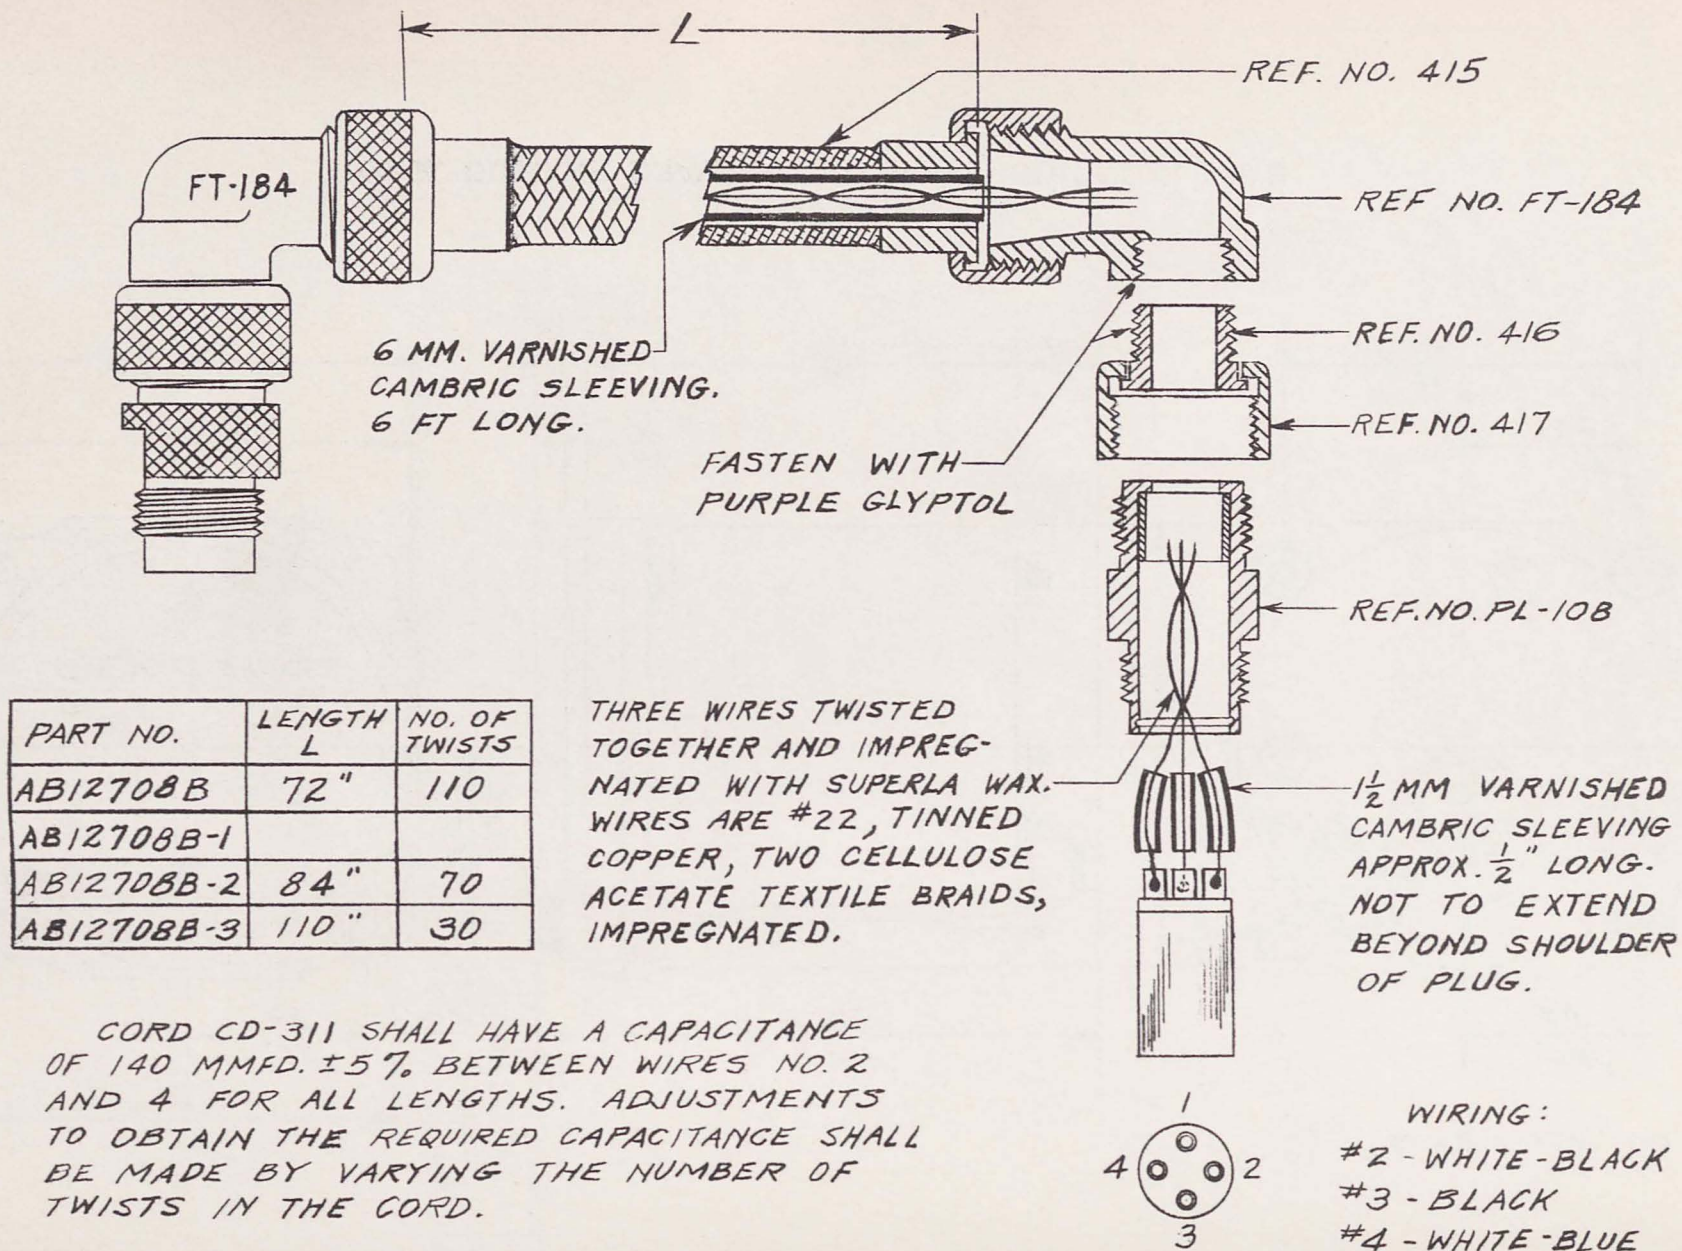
CORD CD-311 ASSEMBLY DRAWING
